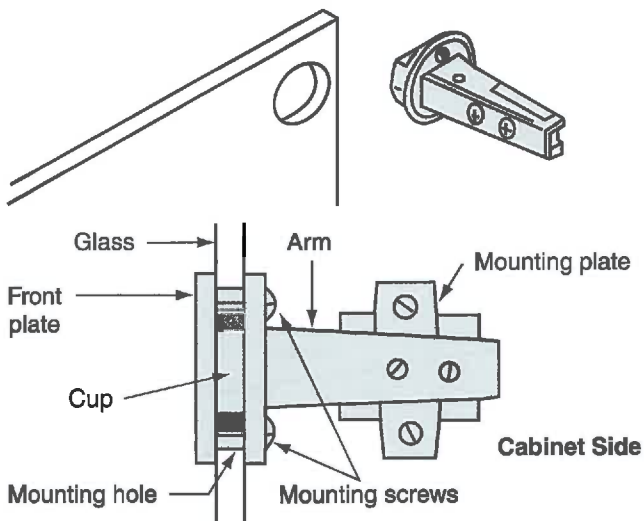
Euro-style glass door hinges require bored mounting holes. (*Häfele America Co.*)
